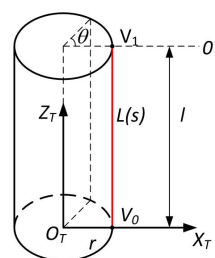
Cutting-able part of cylindrical cutter and its surface model
